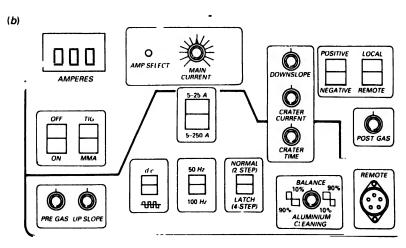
TIGWAVE 250 a.c./d.c. for a.c. adjustable square-wave TIG welding; d.c. TIG, a.c./d.c. MMA welding with arc force control. Flux cored wire welding with CC CV feeders. Input 220, 240, 415, 500 V, the 415 V model at 35 A, frequency 50 Hz. Output 80 OCV single output 5-310 A, 250 A at 30 V and 40% duty cycle, 200 A at 28 V and 60% duty cycle. Adjustable square-wave control. Crater fill control. Arc force control. Trigger hold which in 'ON' position enables use of torch button when arc is established. Depressing button second time triggers the crater fill function. Optional spot timer. Pre- and post-flow gas timer. See p. 501 for drawing of this power unit.
